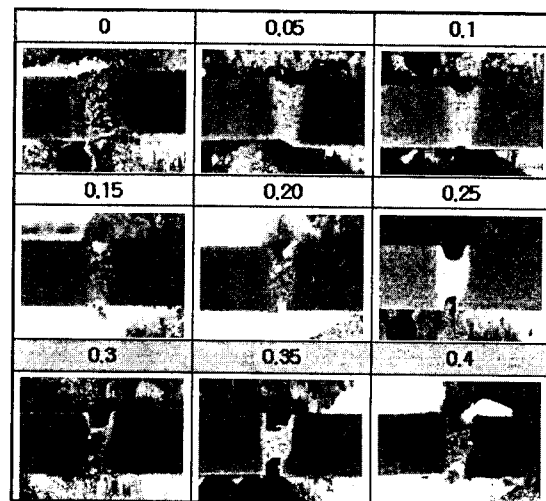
Variation of bead shape after gap opening test on SAPH370 steels. This laser welding was performed with 6kW laser power and 5m/min welding speed.
